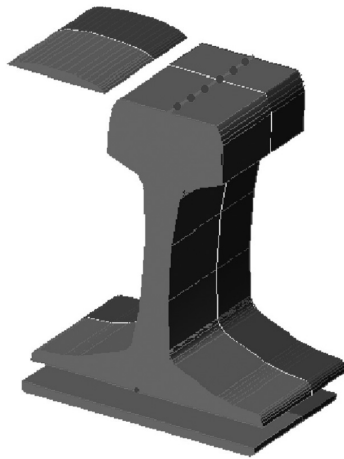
The position of hardness testing in the Weld and HAZ.
